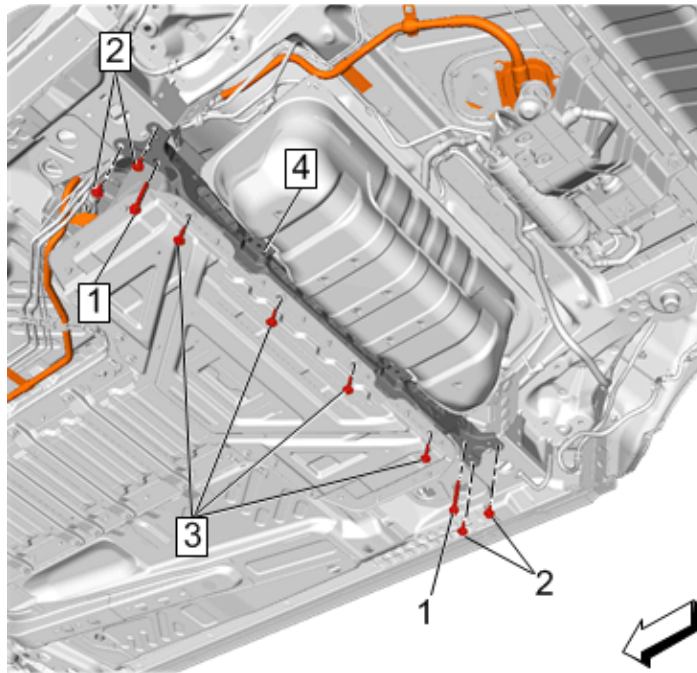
Drive Motor Battery Tray Fasteners And Floor Panel Bar
